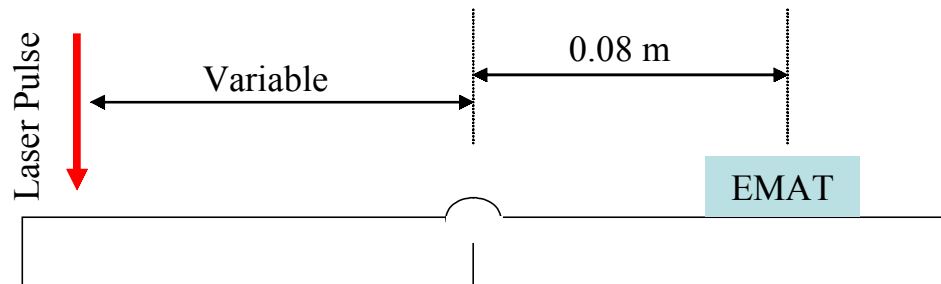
Experimental Setup 2 to determine unknown wave on the generation side of the weld bead
